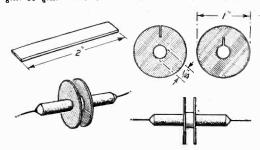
Details of former construction for winding correction chokes on a resistor.
